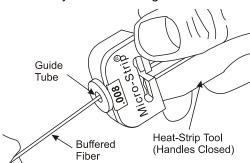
Heat-Strip Tool–Remove Fiber Coating from Buffered Fiber
